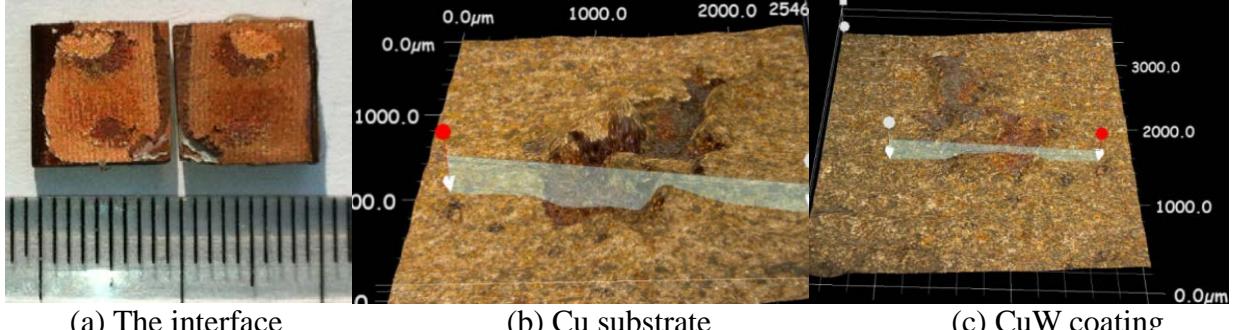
The fracture morphology of Cu substrate and CuW coating after wedged load test
